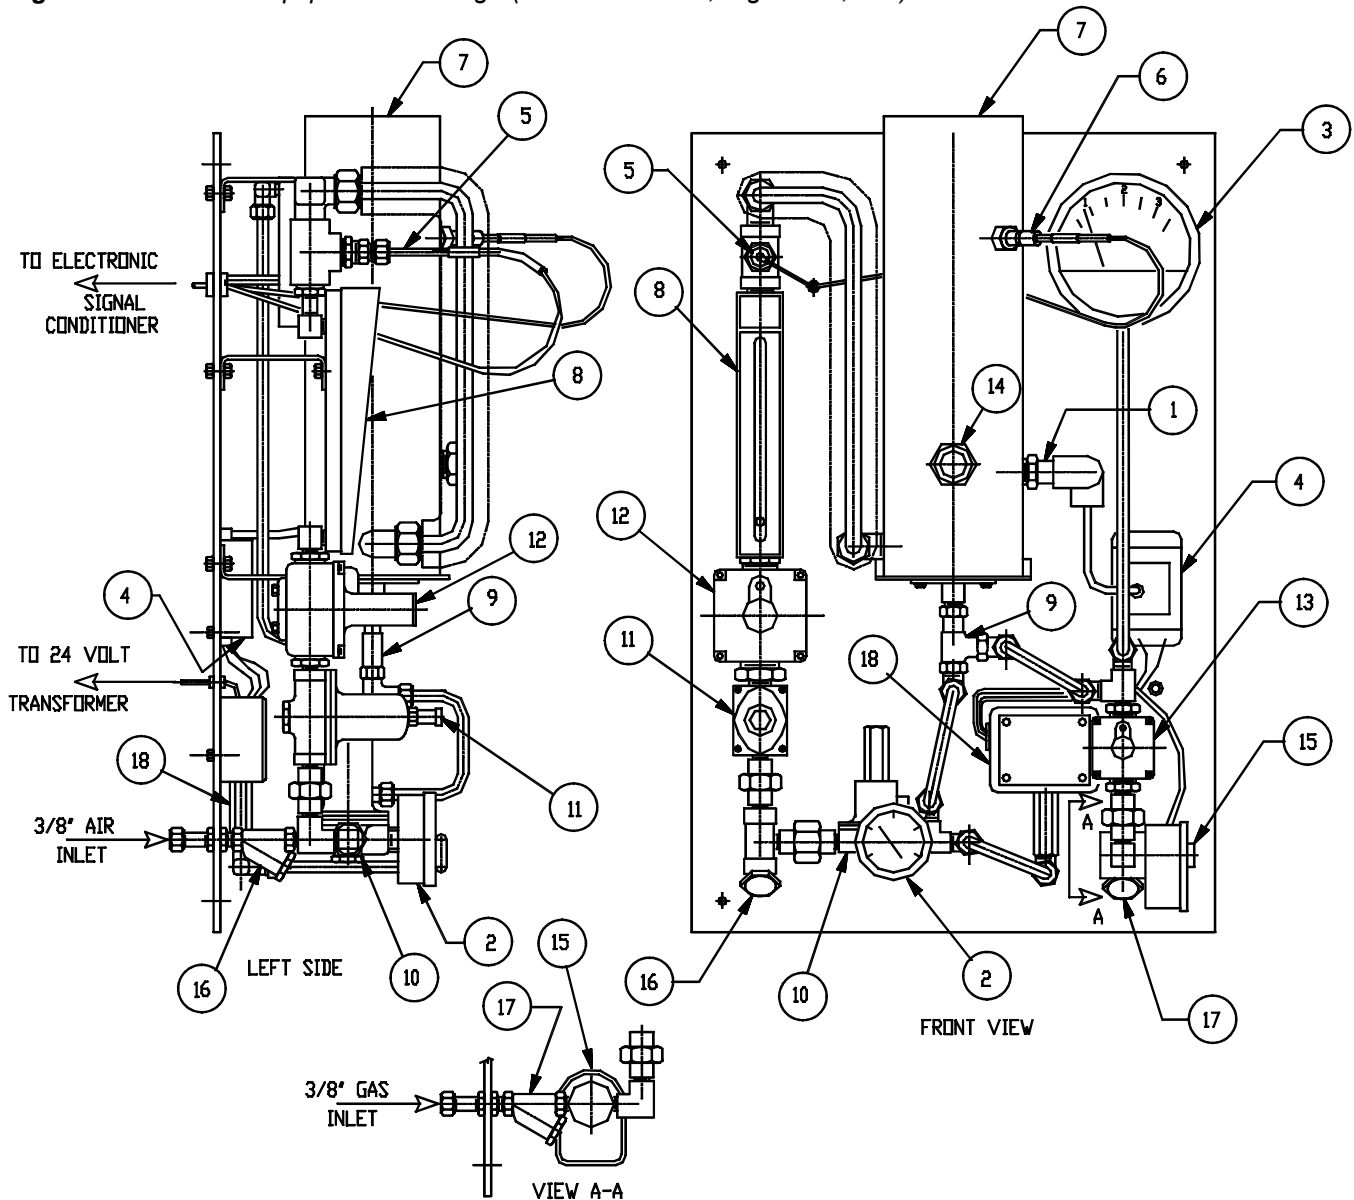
GA500W Equipment Drawing...(burner chamber, regulators, etc.) – 363-601 Revision A
